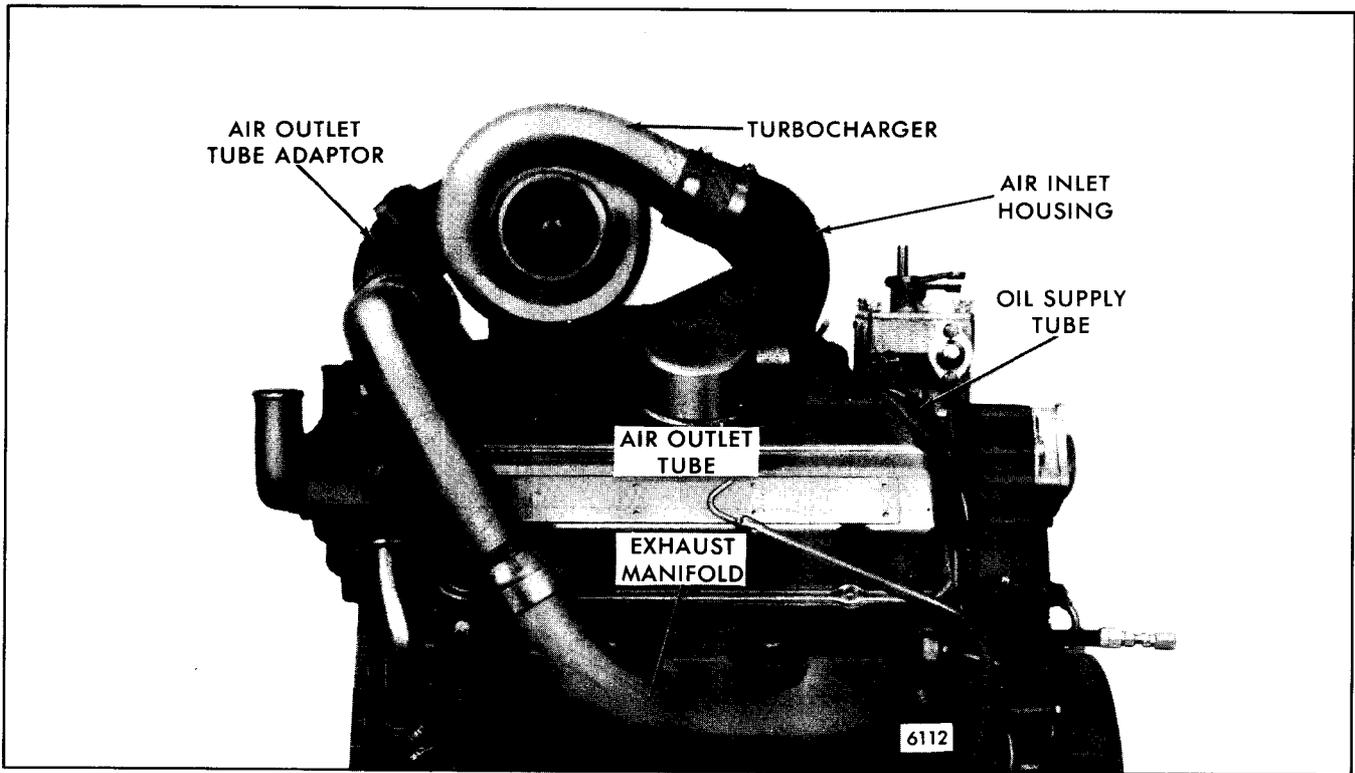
TV61 Turbocharger Mounting (6V Engine)
